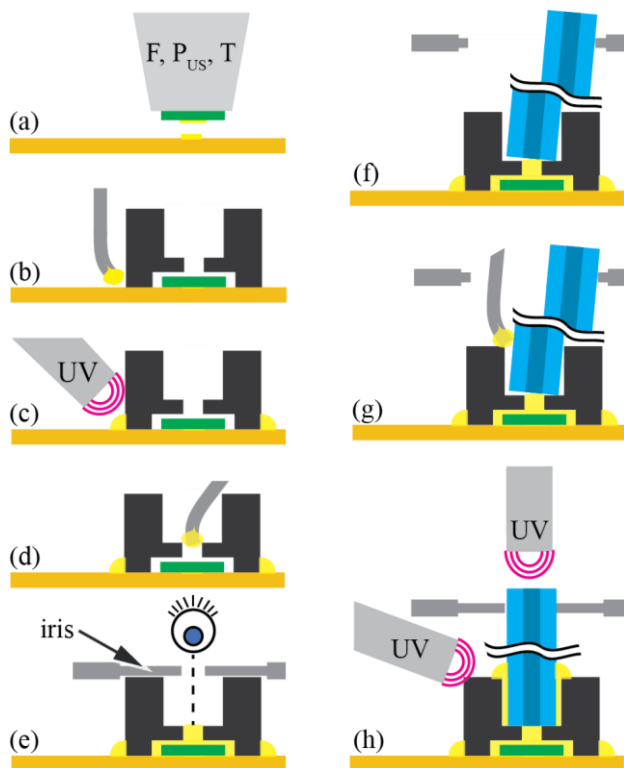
System assembly: (a) Mechanical fixation and electrical inter-connection between bare LED chip and PI-cable using a flip-chip bonder; (b) positioning and (c) attachment of Si housing using UV curable adhesive; (d) additional adhesive applied to fill LED recess; (e) alignment of closed iris relative to aperture; (f-g) fiber insertion, alignment and fixation by (f) applying adhesive, (g) closing optical iris, and (h) curing adhesive by UV exposure.
